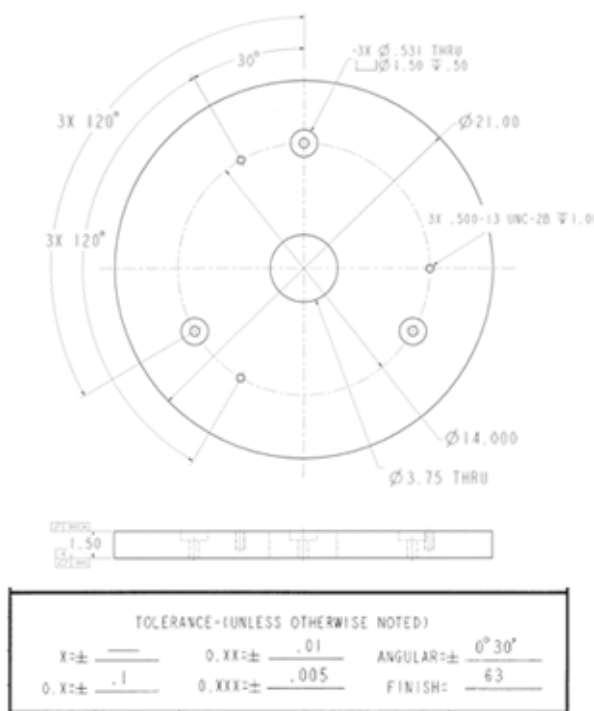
Engineering Drawing (128Y-270955-D6) of the Platen Adapter Plate (Dimensions in Inches).
